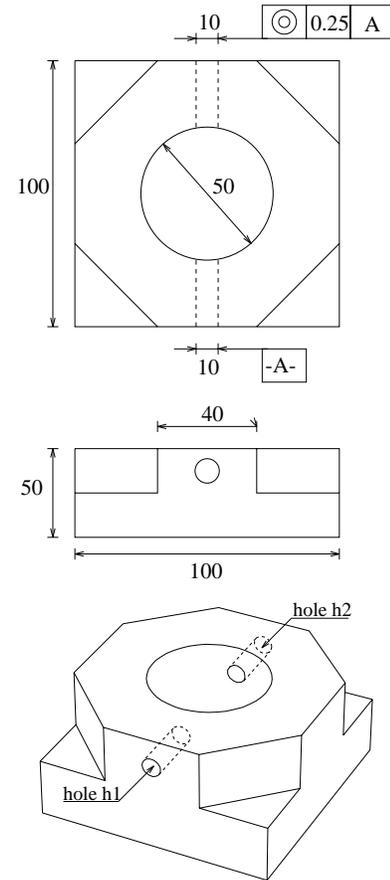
An Example of a design with dimensions and tolerances that cannot be achieved on a 3-axis vertical machining center (from [5]).
